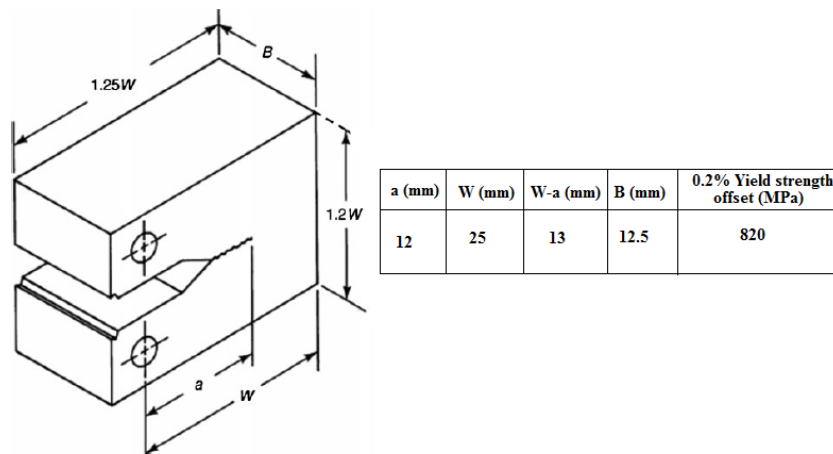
Standard ASTM compact tension (CT) specimen for fracture toughness tests [26].
